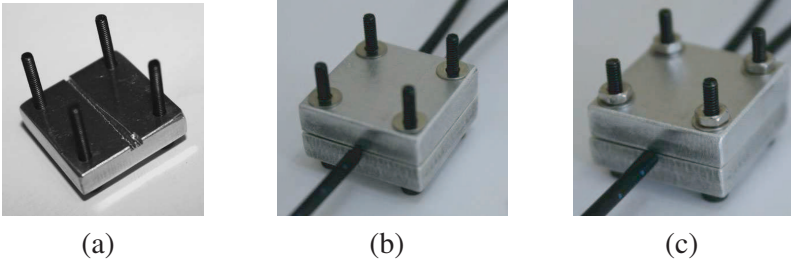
Assembling of the 1×2 asymmetric coupler, (a) mold insert with connecting screws, (b) fibers insertion and top plate placement, (c) connecting screws are secured.
